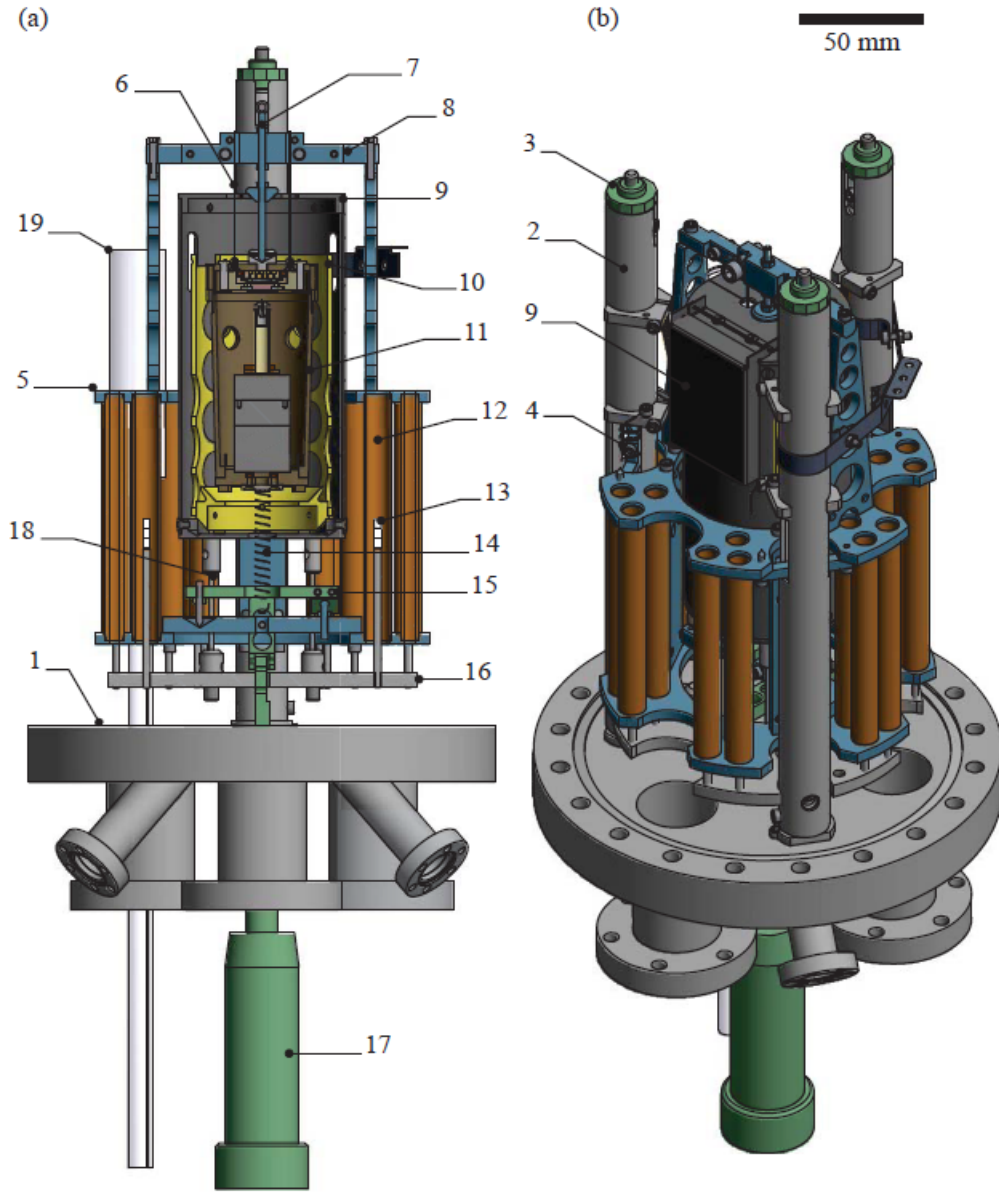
Model of the STM microscope with the flow cryostat, a) cut by platform b) isometric view. Individual parts: (1) flange DN160CF, (2) tube column, (3) set screw, (4) supporting screw, (5) platform, (6) stainless steel wire, (7) arresting needle, (8) frame, (9) radiation shield (10) anti-vibration weight, (11) microscope head, (12) copper tube, (13) magnet, (14) tension spring, (15) Arrest warrant, (16) support desk, (17) lock screw, (18) thin-walled tubes, (19) flow cryostat. Taken from [23].
